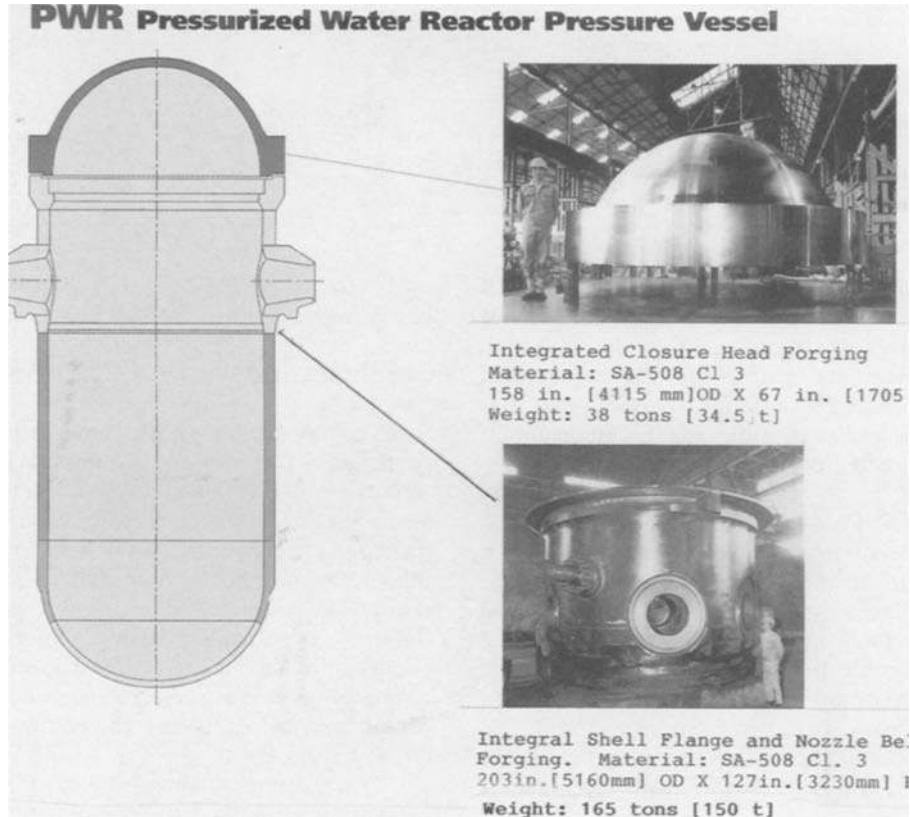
Integrally forged shell flange and nozzle belt and integral flange and closure head forging for a PWR vessel. Forgings to SA-508/SA-508M Class 3 are preferred for these nuclear reactor vessel components. (Courtesy of the Japan Steel Works Ltd.)
